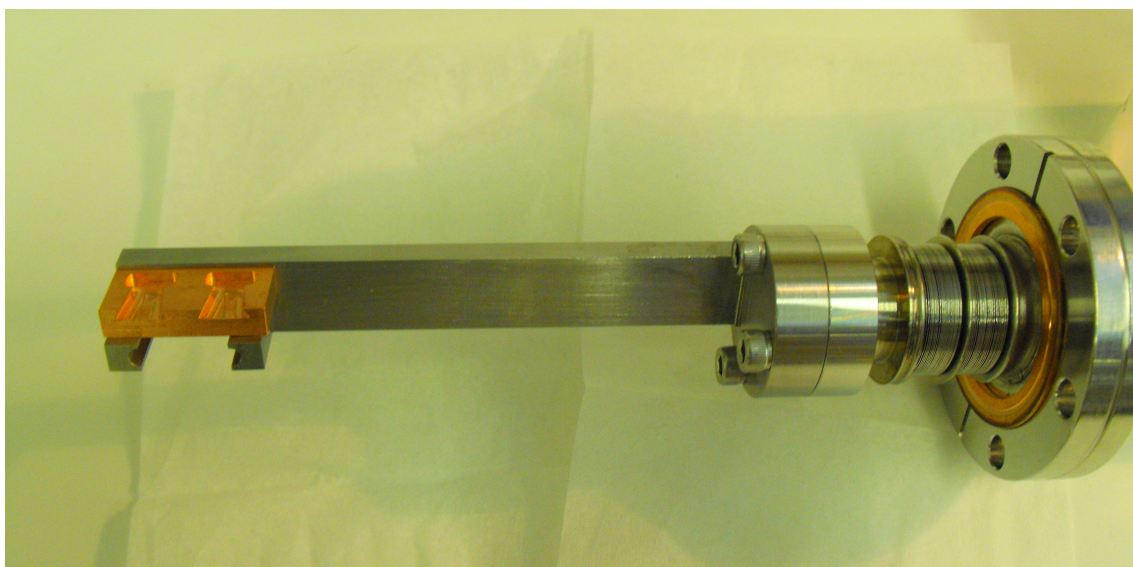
Load-lock insert fabricated for the Cryogenic STM
